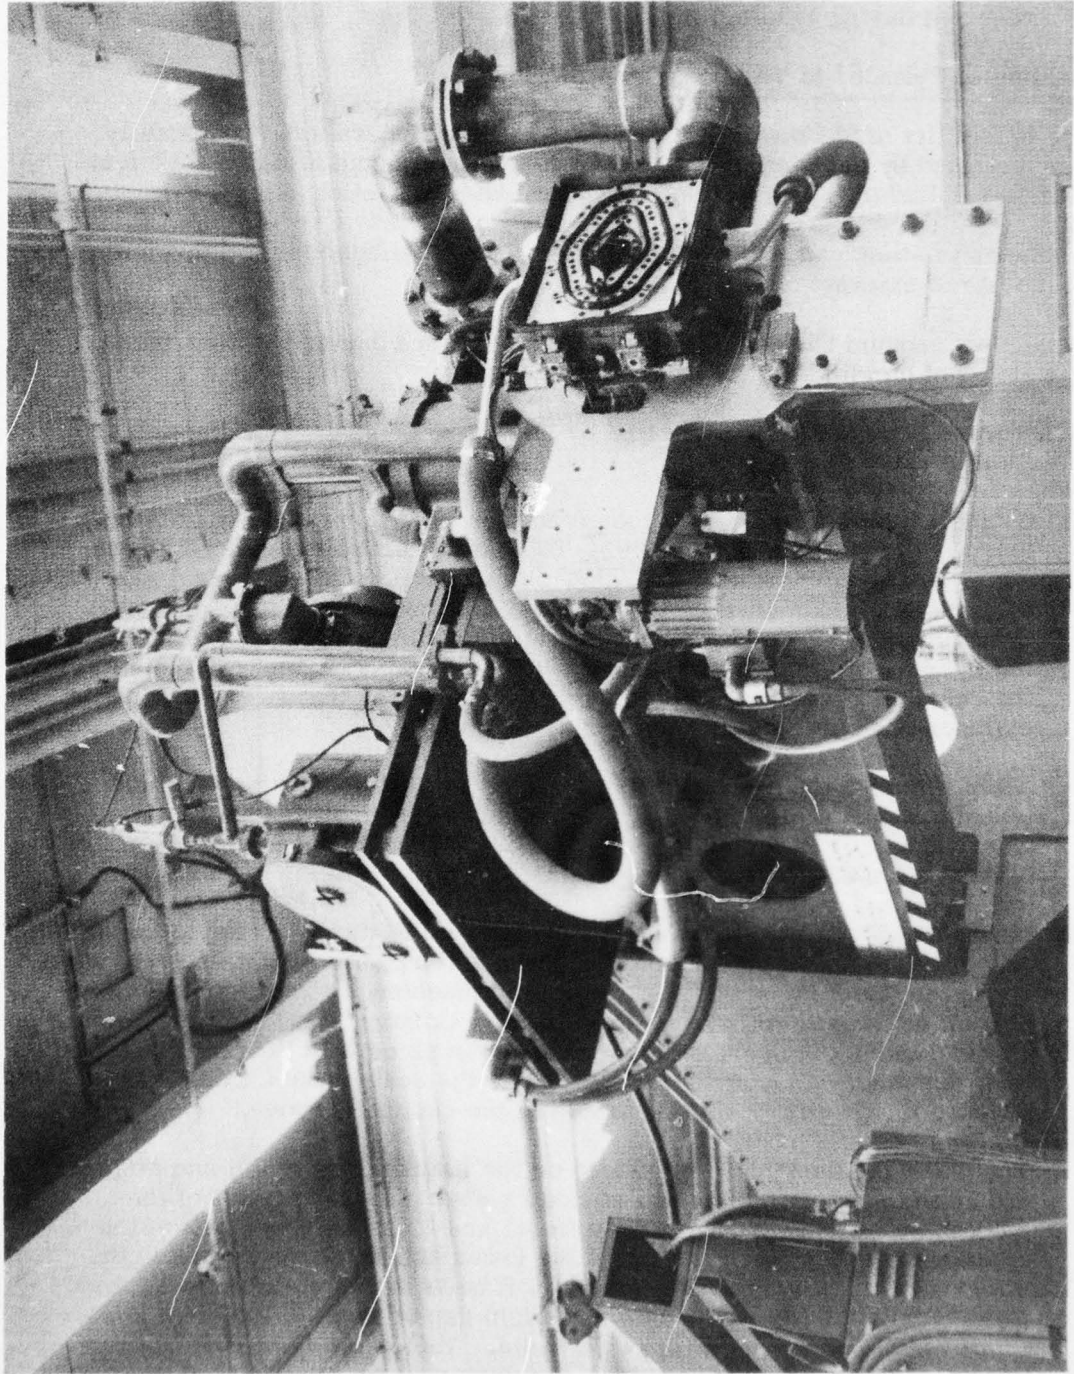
SSEB Head Assembly With Curved Head Plate Mounted in Vertical Position
